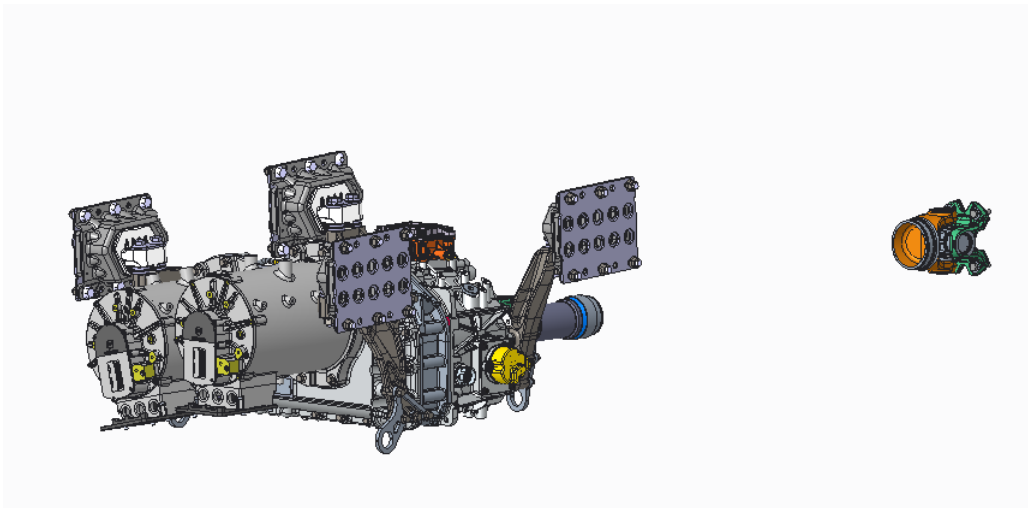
Top view of drive axle in full droop and pusher in full bump.
